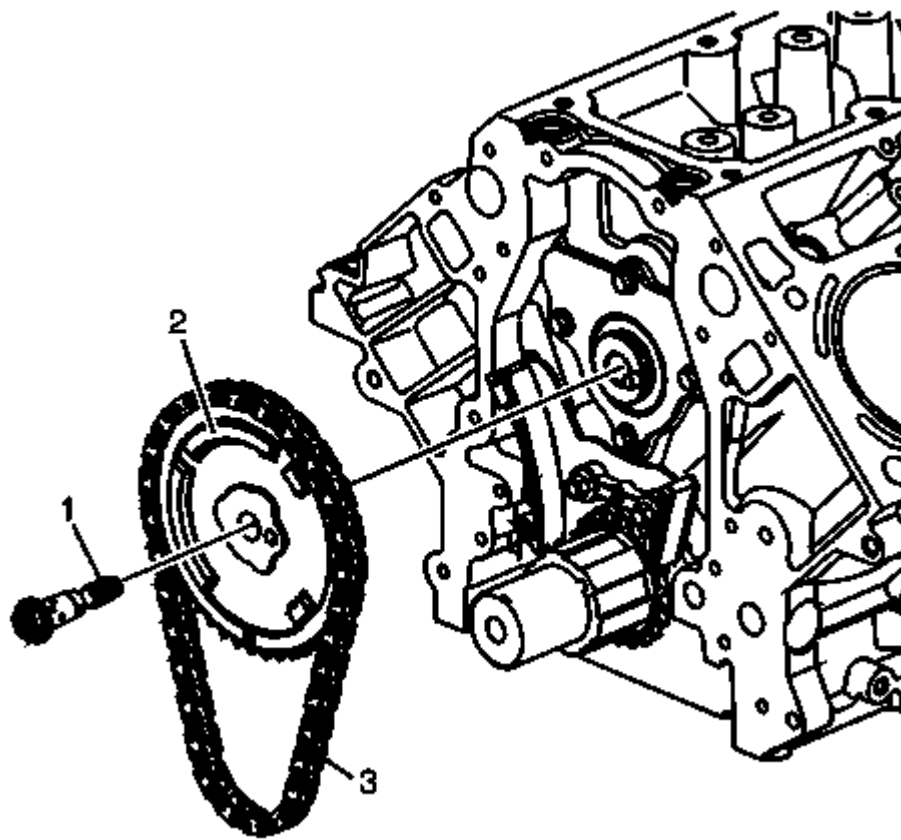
Identifying Timing Chain, Camshaft Sprocket & Bolt
